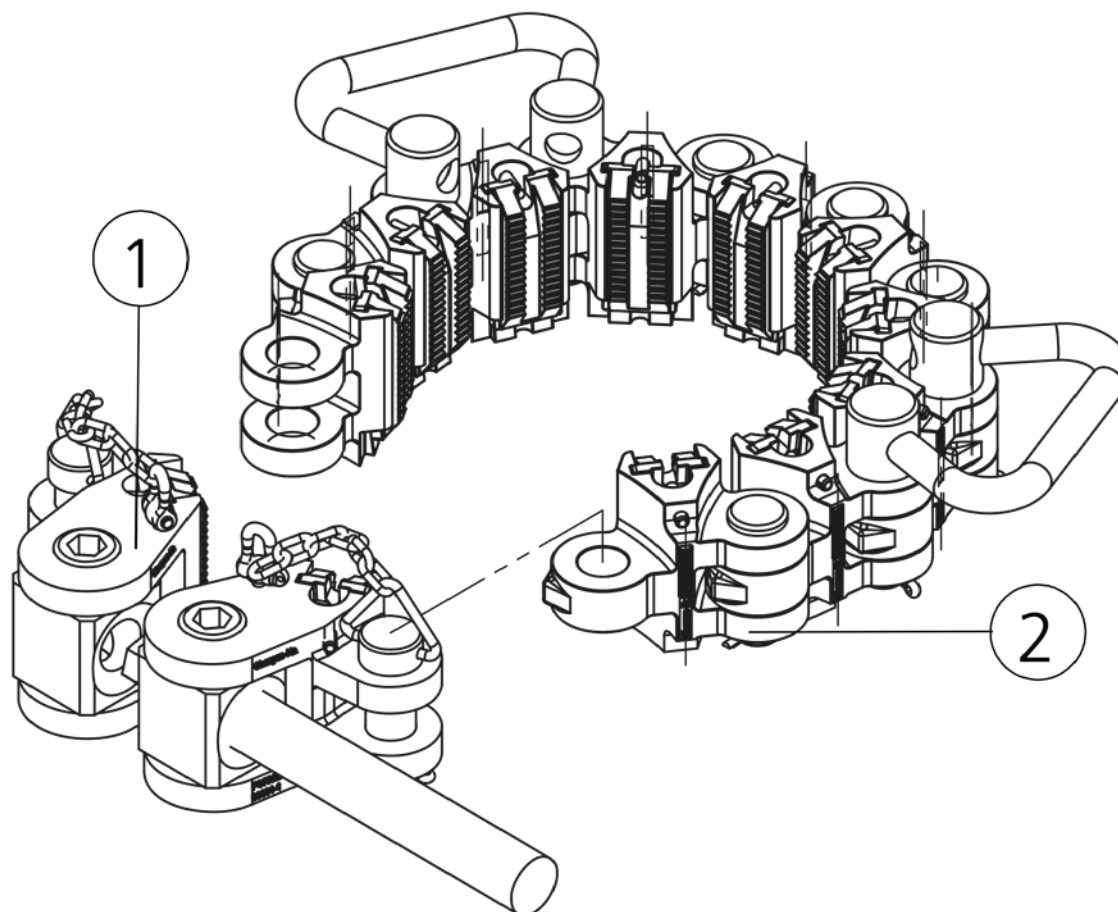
Principle drawing Pneumatic-Kit for Safety Clamp
